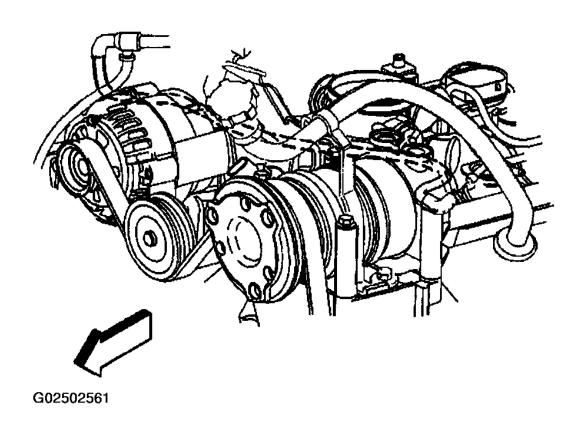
Connecting Vacuum Hose To Intake Manifold Courtesy of GENERAL MOTORS CORP.
